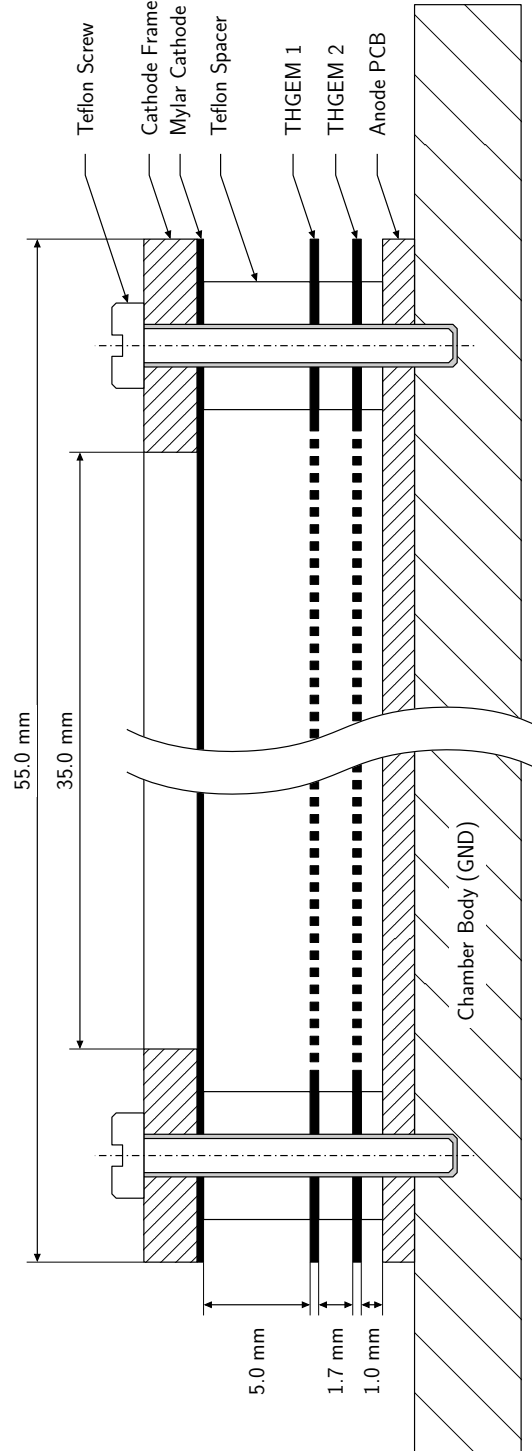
A cross-sectional view of the THGEM imaging detector. The entire assembly is bolted inside the gas containment chamber using Teflon screws and spacers for the various gaps.
